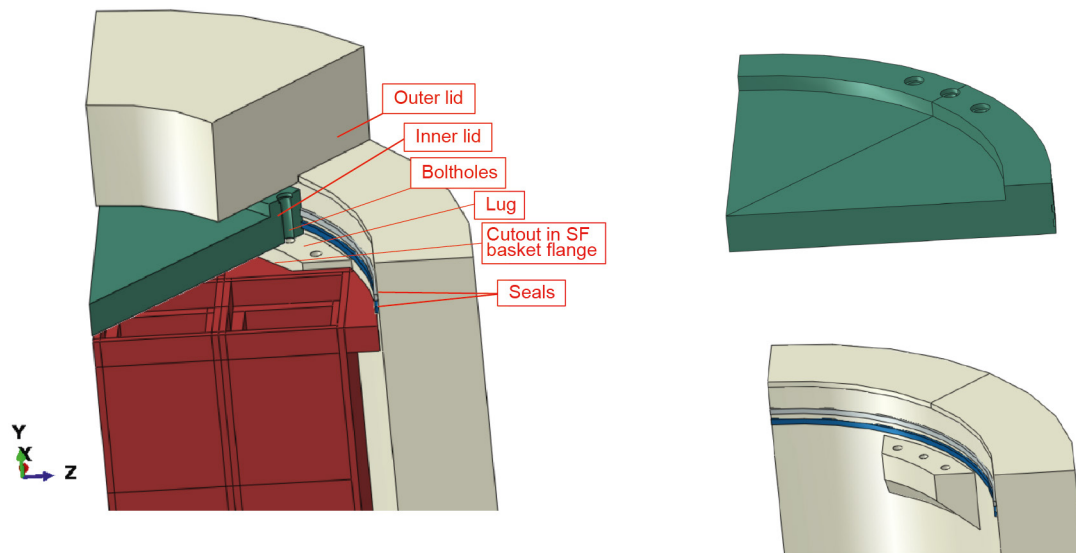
Push-fit lid with support lugs and bolts foreseen for the SF canister: cutaway view (left), inner lid (top right) and lug showing bolt-holes (bottom right)
